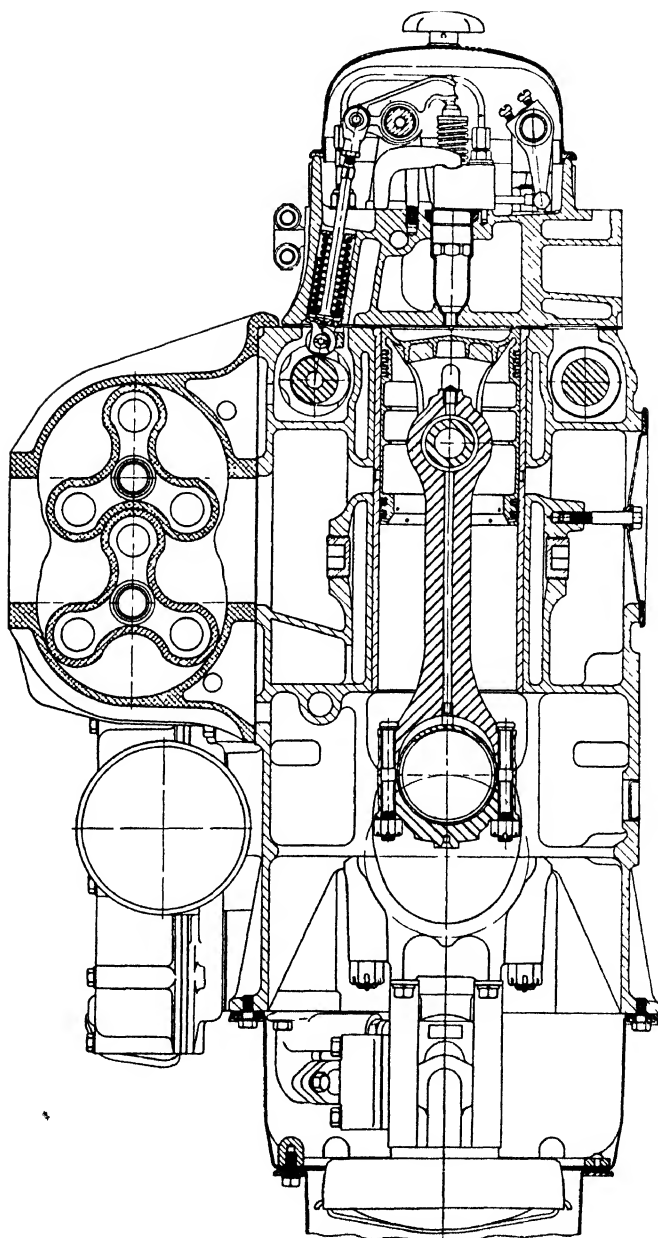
CROSS SECTION OF GENERAL MOTORS TYPE 6-71 ENGINE.
